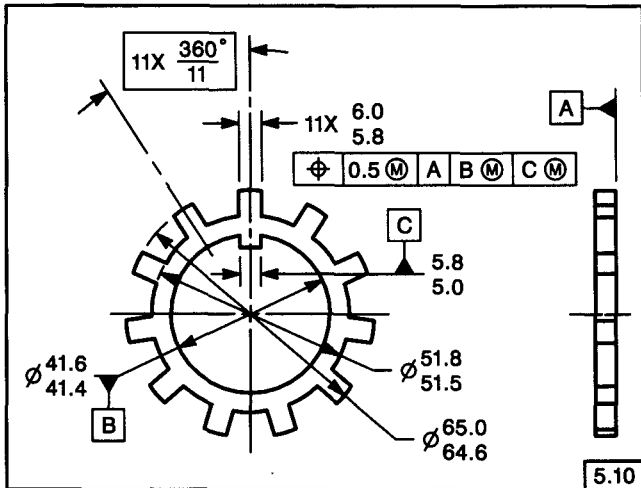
POSITIONAL TOLERANCING OF TABS
